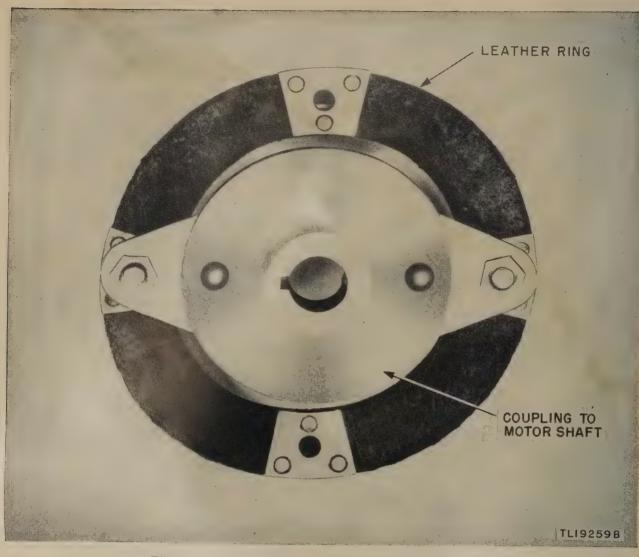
Bearing Indicator BC-1159-A, flexible coupling.
